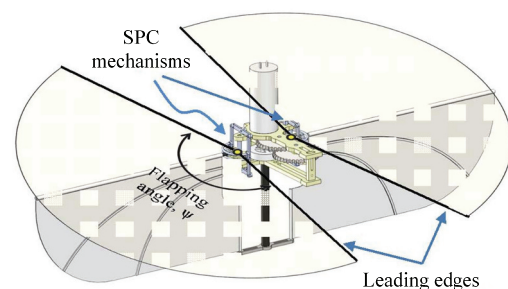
Assembly of flapping wing and SPC mechanisms.
